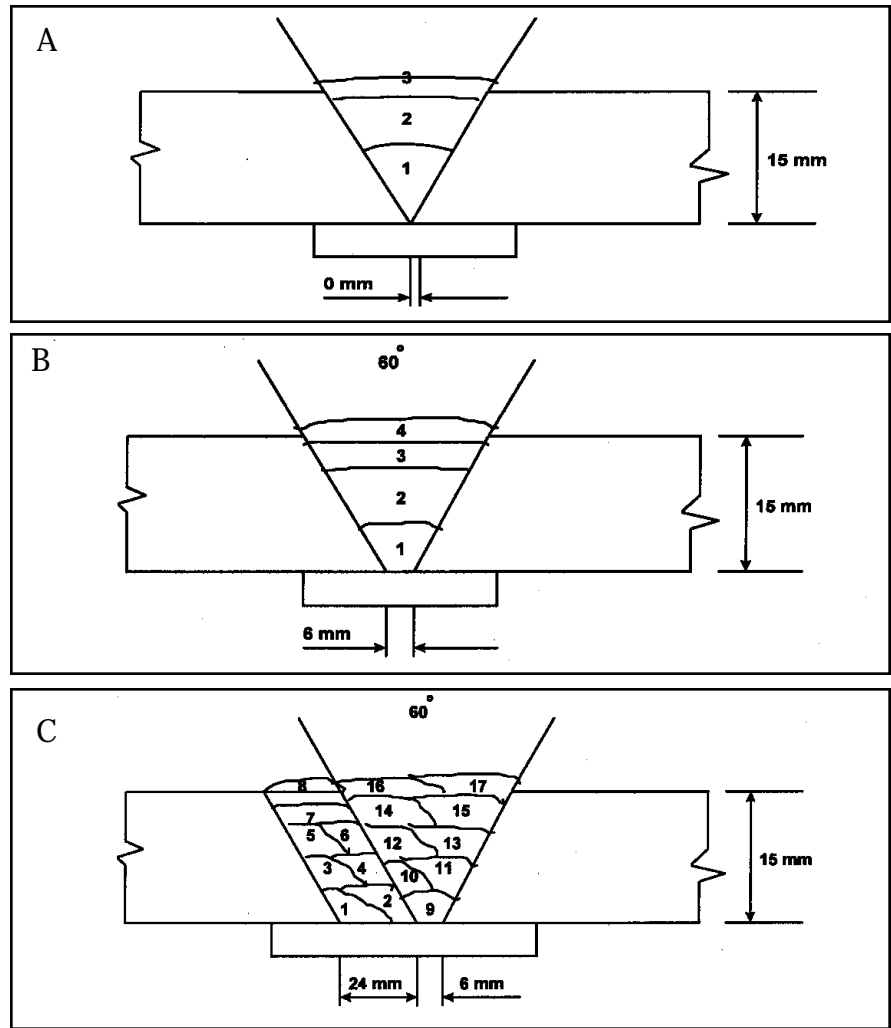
Schematic cross sections of the test specimens. A — 0-mm root opening; B — 6-mm root opening; C — 30-mm root opening built up with 24 mm of weld material to create a specimen with a 6-mm root opening (the numbers in each area of the weld zones represent the welding sequence of the multipass weld).
